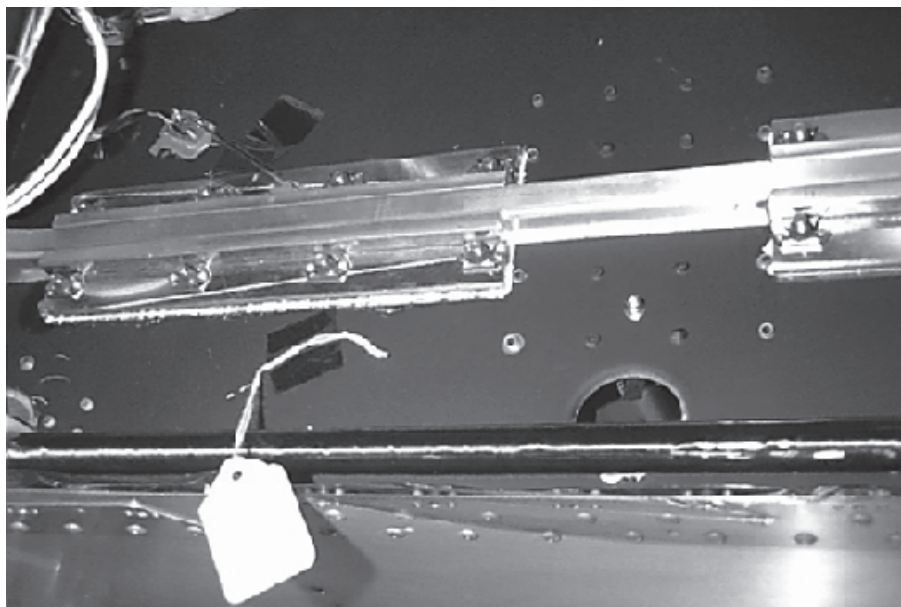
Heat pipe assembly with clamp mounted inside of AO-40. KD1K photo
